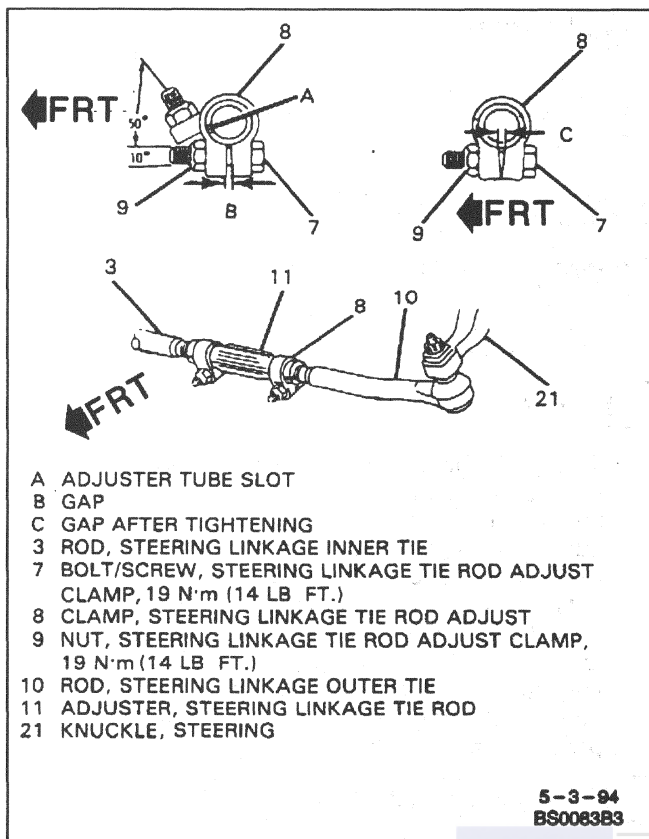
Positioning Steering Linkage Tie Rod Adjuster and Adjust Clamps
